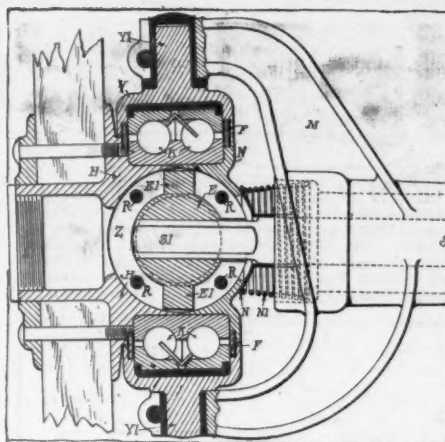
CONSTRUCTION OF ROVAN UNIVERSAL JOINT
